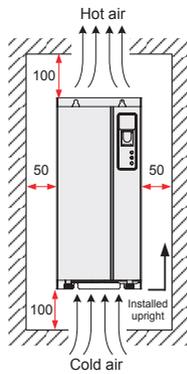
Mounting dimensions of MDBUN series braking units (mm)
